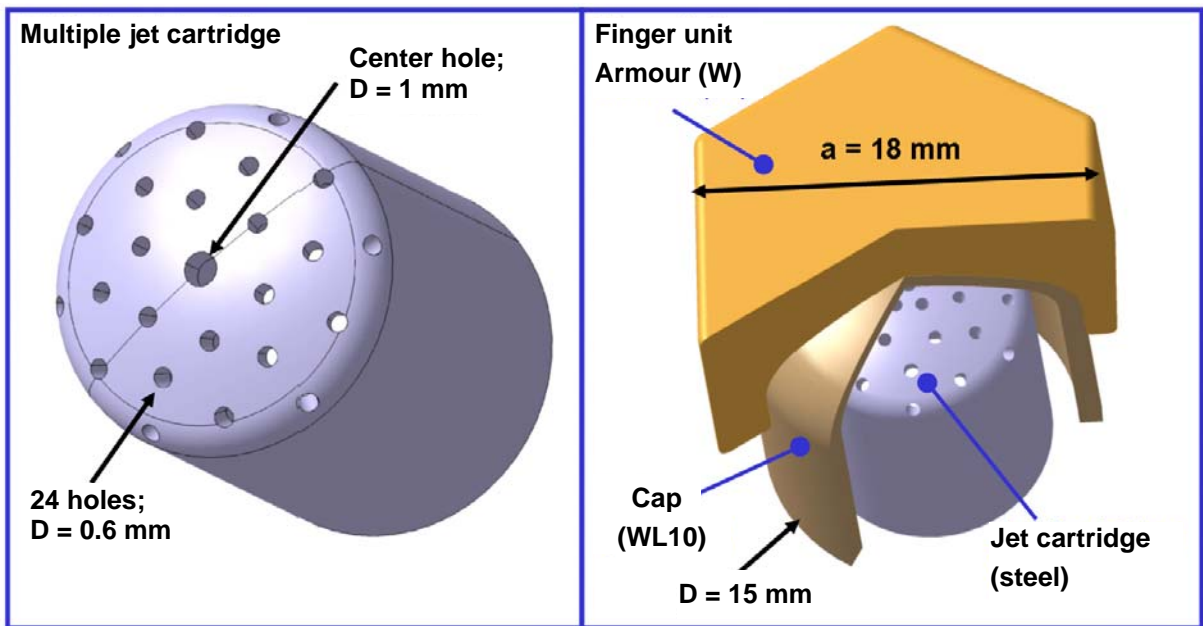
Exemplary layout of a jet impingement cooling finger for the gas-cooled divertor.
